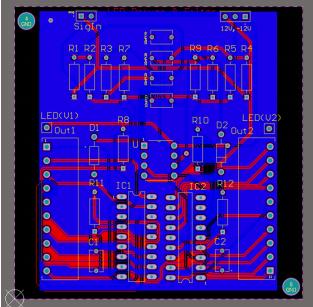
Filter And LED Driver PCB 2D Bottom Layer
